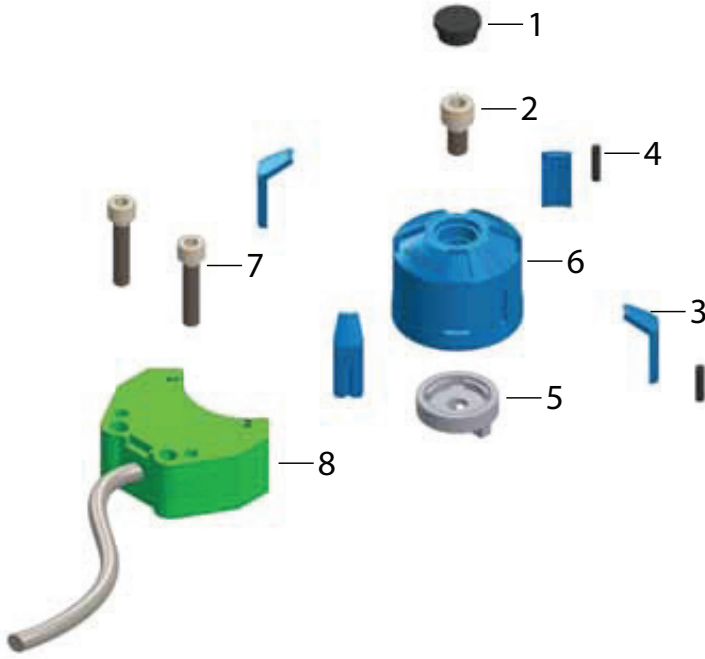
Exploded Picture of Magnetic Limit Switch Box
